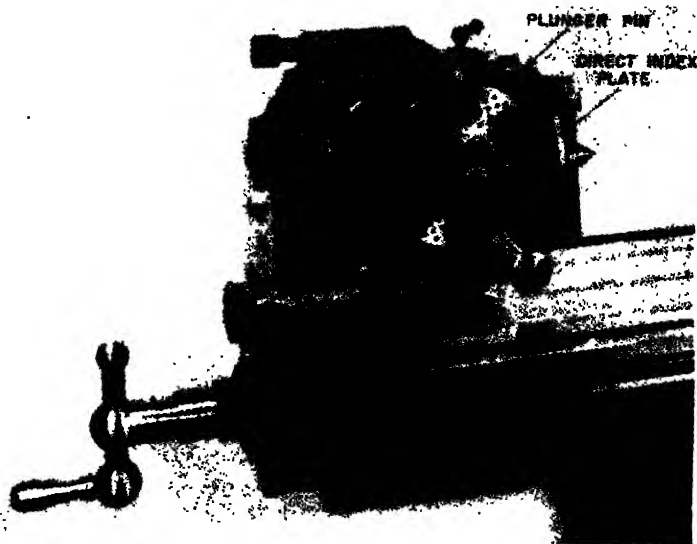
The Brown & Sharpe index head showing the plunger pin and the direct-index plate. (*The Brown & Sharpe Manufacturing Company*)
